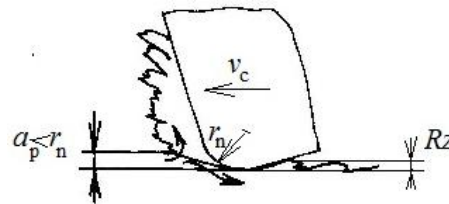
Mechanism of material deformation before the cutting wedge in case of minimal cut depth a_p
